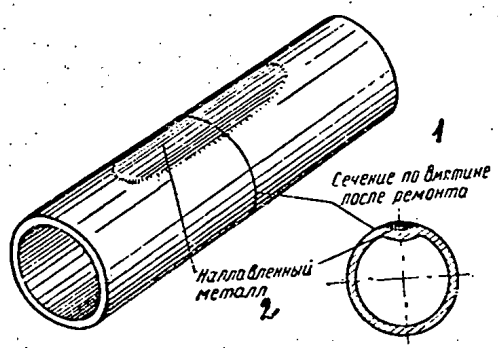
Repairing a dent by depositing of weld metal
